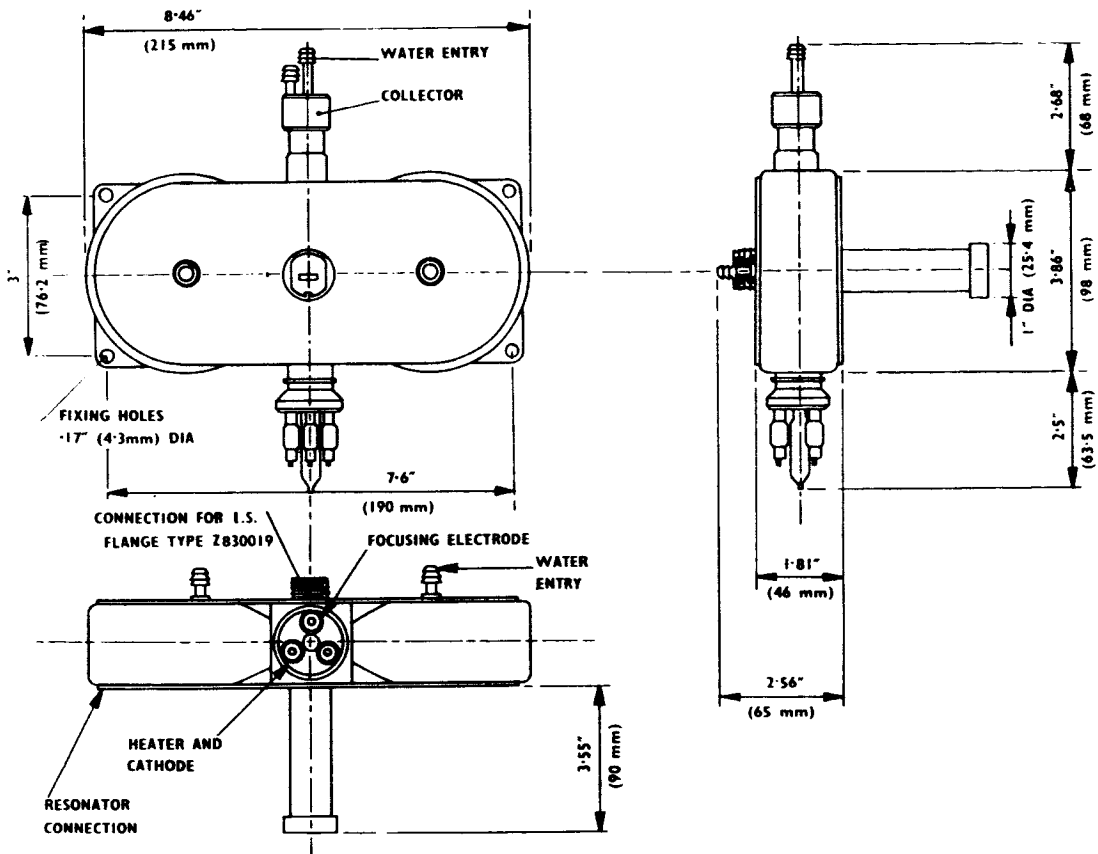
L-3628 Millimeter Wave Tube Outline Drawing
